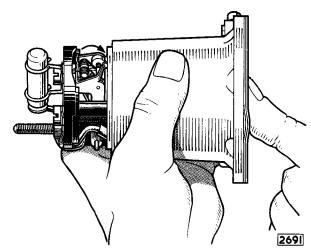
Checking the "throw-over" of the toggle mechanism.
